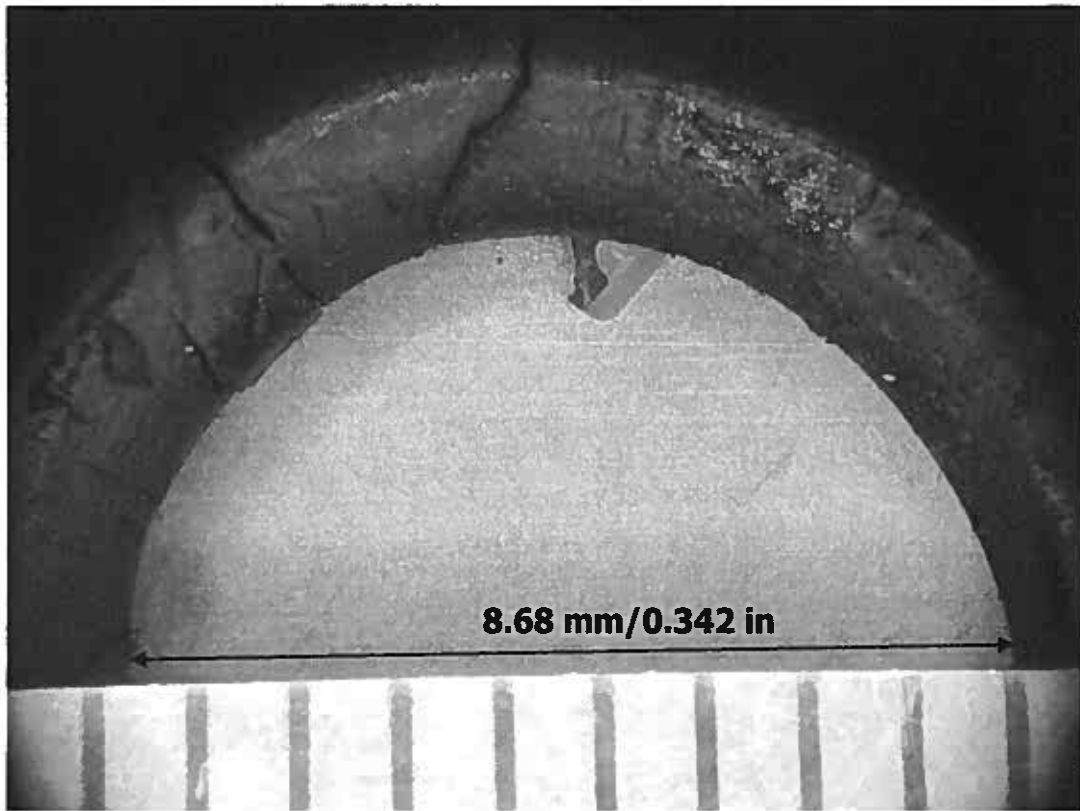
Reassembled O-ring. Estimation of inner diameter.
